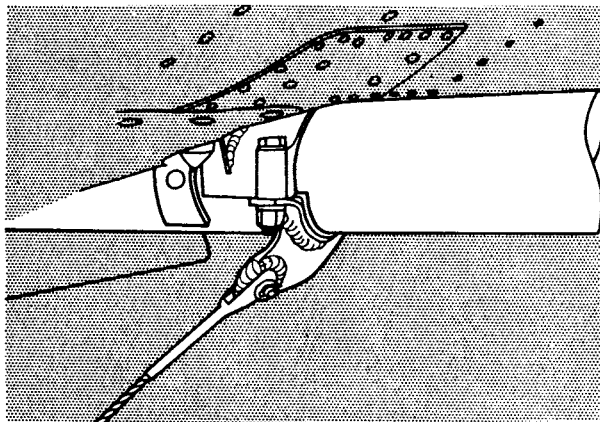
Typical cargo sling installation No. 3 (showing cable sling leg attachment to landing gear cross-tube fitting).
